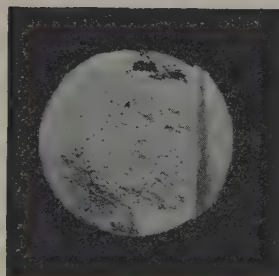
Fracture and inclusions, nickel-chromium-molybdenum steel No. 34. Transverse specimen.
